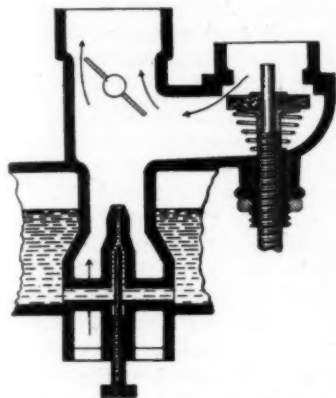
Typical Automatic Carbureter. Primary air opening is fixed. A needle valve controls the spray orifice. Spring tension and lift of auxiliary air valve are separately adjustable.
